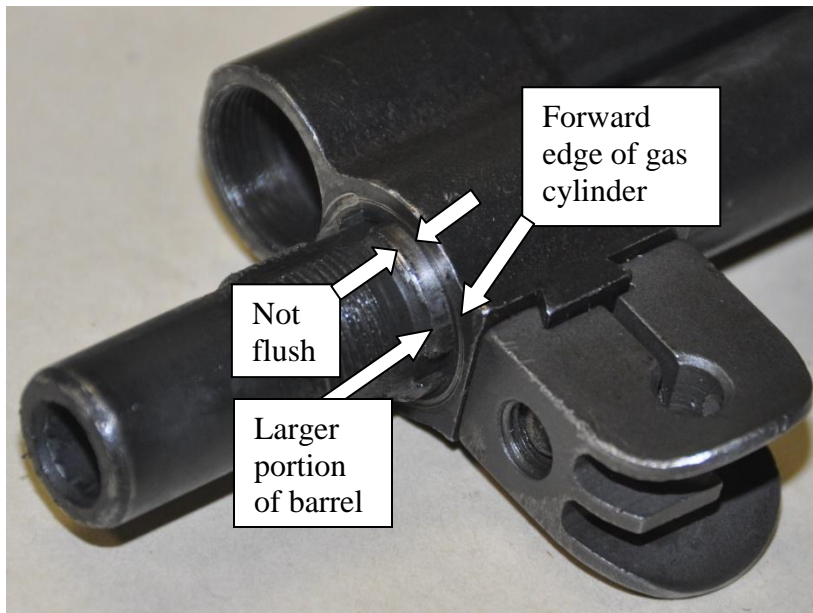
Gas cylinder positioned INCORRECTLY (too far rearward)
